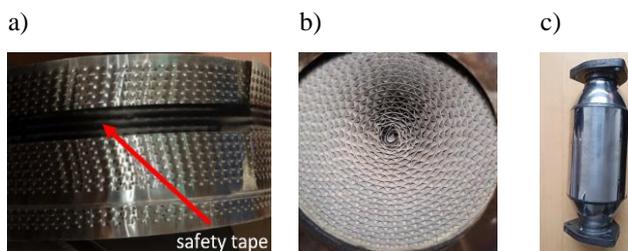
View of selected stages of metal carrier manufacturing: a) securing the film with tape before restoring the original shape b) cross-section of the finished carrier, c) view of the complete particulate filter
